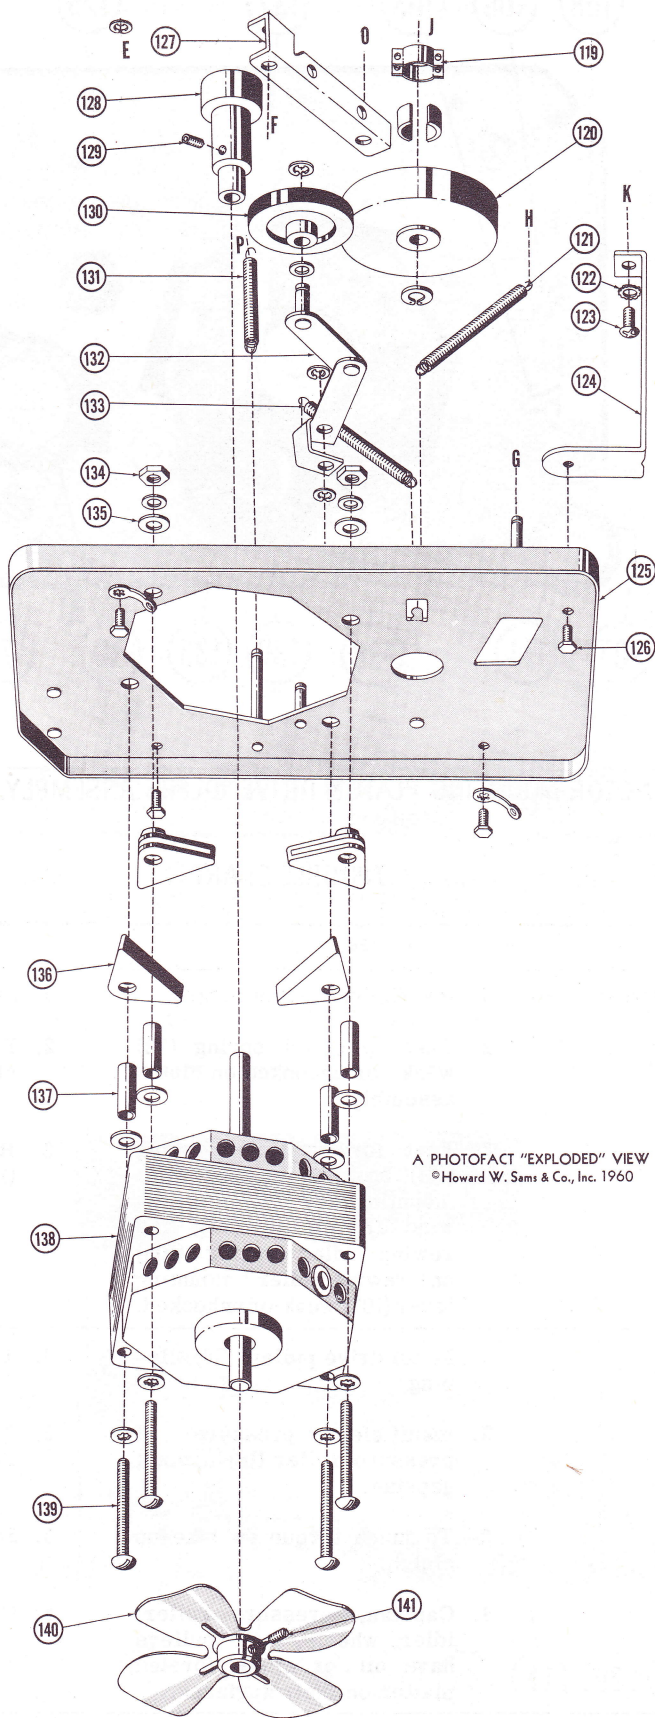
D EXPLODED VIEW OF PARTS BELOW MOTORBOARD (CONT.)
